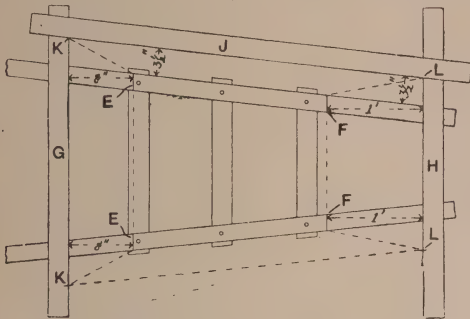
Plan of Bottom Frame of Stable Barrow
